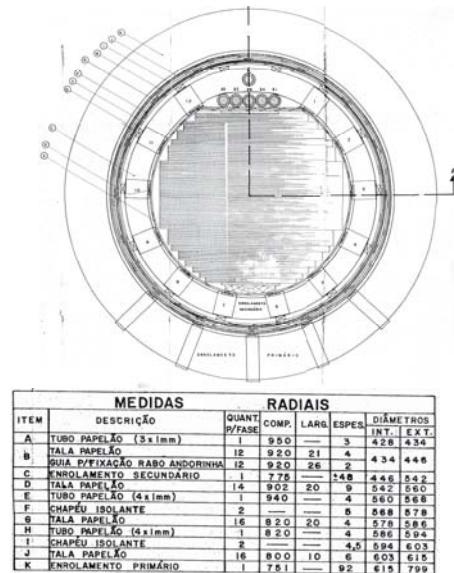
Transformer insulation drawing showing the geometry and associated dimensions.
